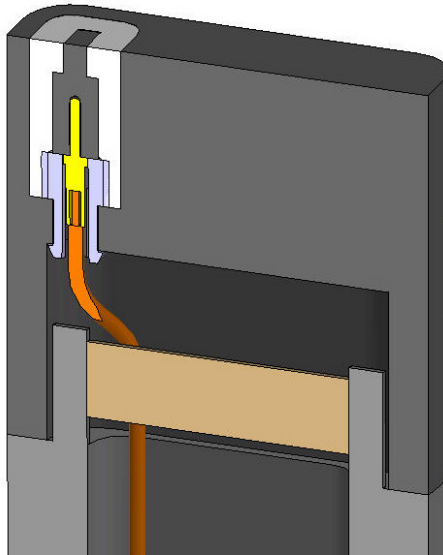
Cutaway view of the assembled injector head showing the integrated Langmuir probe.
